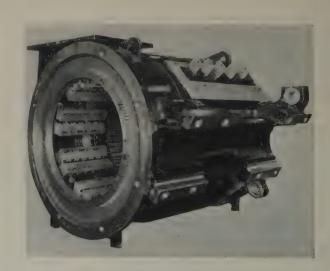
Traction motor stator with frame head removed to show brush holders and revolving yoke
